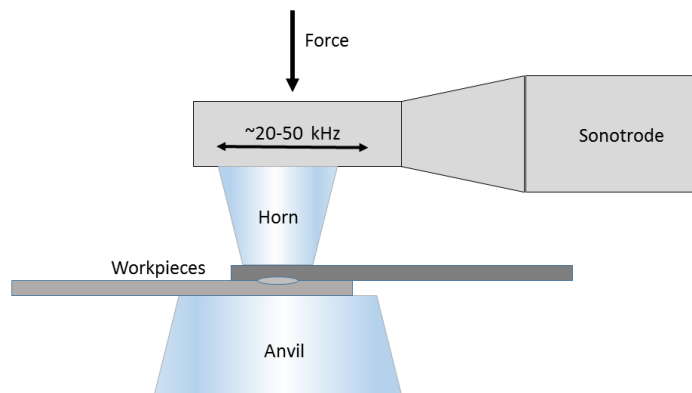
Ultrasonic Welding Diagram.
